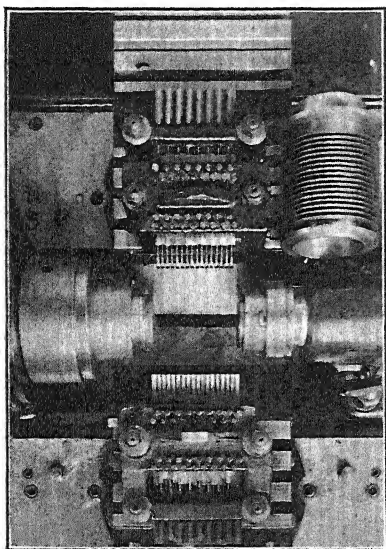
A Plan View of a Tool Setup on the Lodge and Shipley Duomatic Lathe for Roughing and Finishing the Straight-Sided Fins of Air-Cooled Airplane Engine Cylinders.
